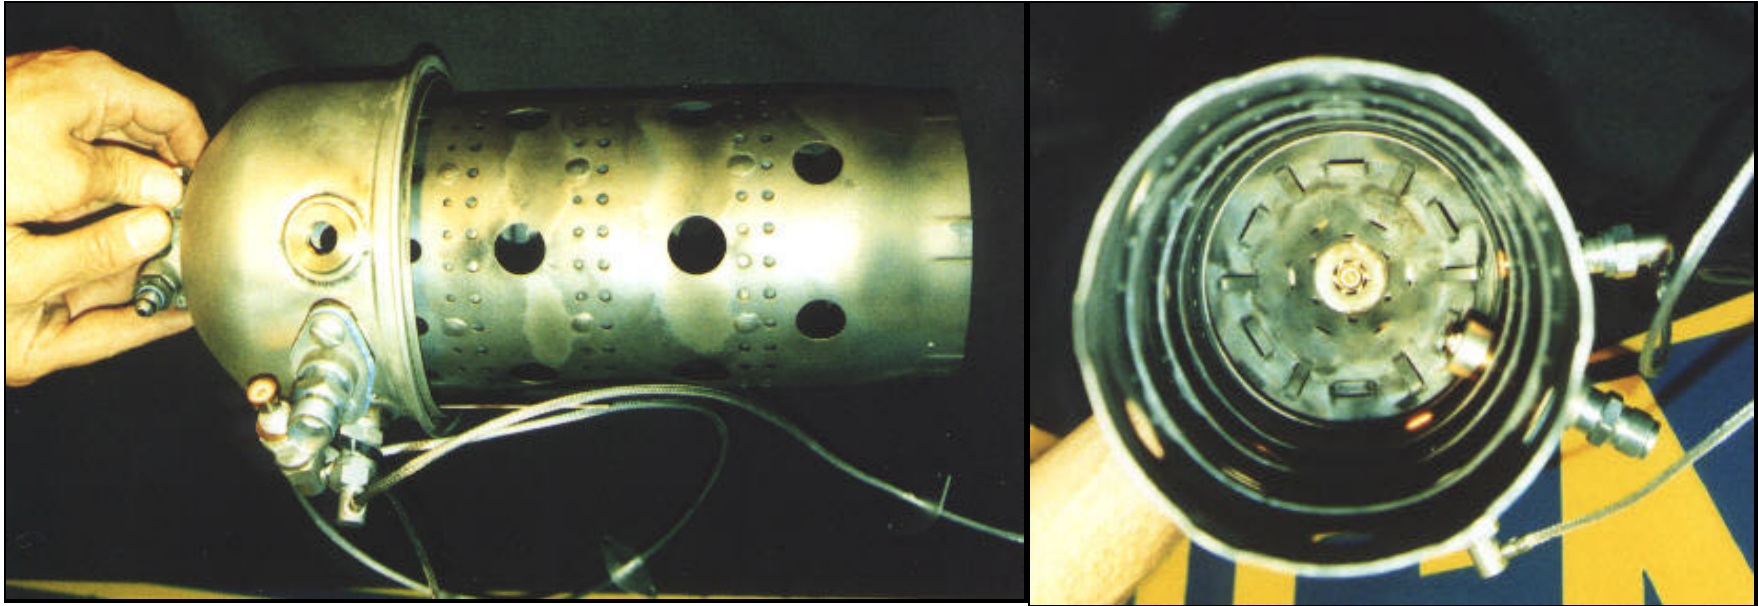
Combustion chamber view with fuel atomizer, igniter, glow plugs and holes for secondary cooling
